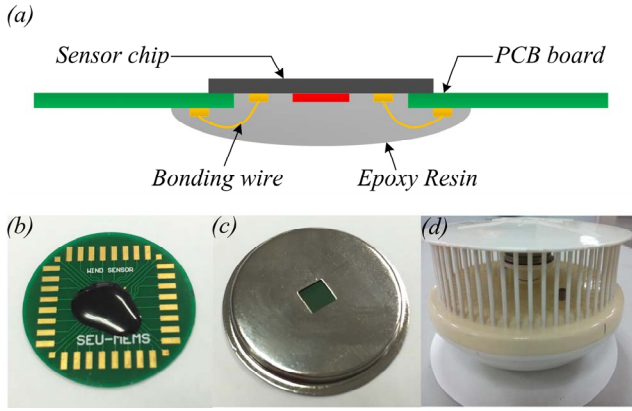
The self-package of the wind sensor. (a) Schematic cross-section view of the packaged traditional wind sensor. Photograph of the fabricated wind sensor (b) after wire bonding and sealing with epoxy resin; (c) glued to the aluminum frame; and (d) packaged in the protection shell.
